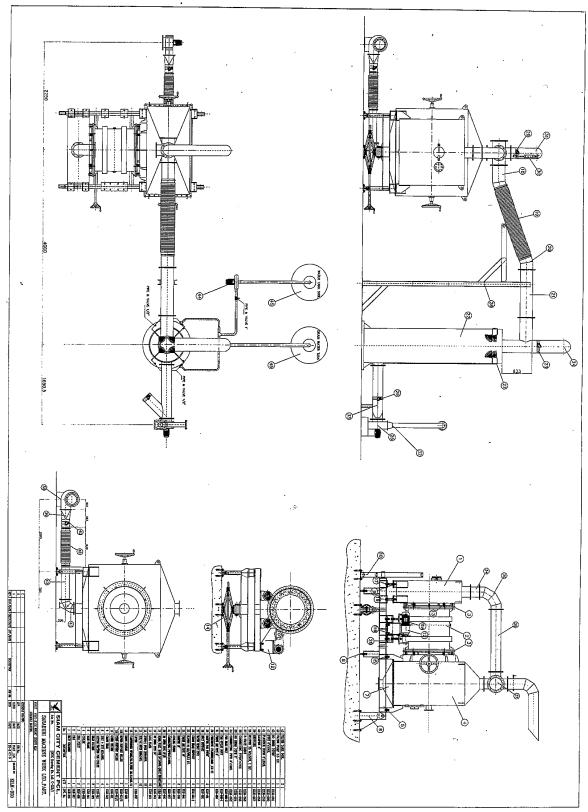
The pilot-scale rotary cement kiln assembly drawing
